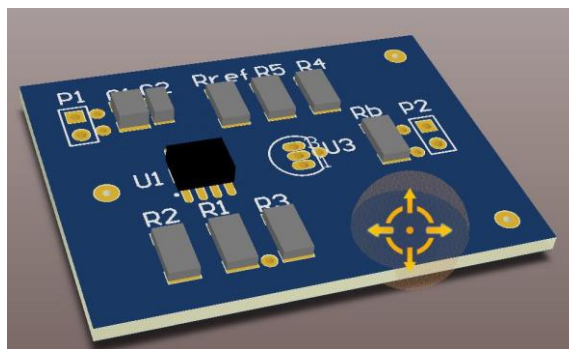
3D VIEW OF PRINTED MATTER.
